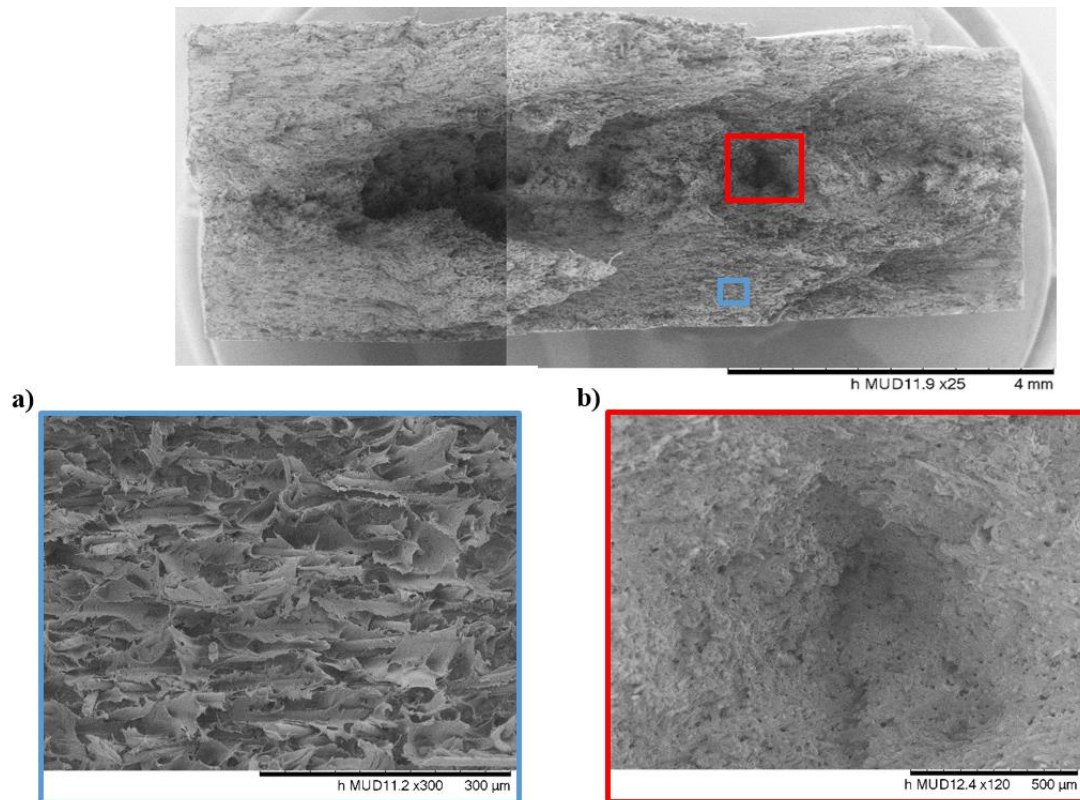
Fracture surface of a fatigue 90° specimen at 100° C
